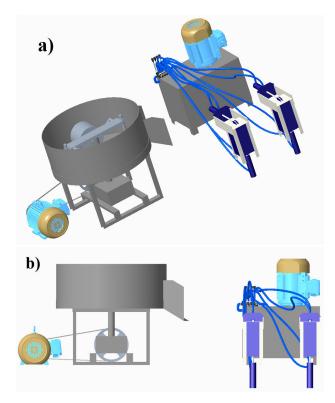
(a): Moulding machine (Isometric view). (b): Moulding machine (Front view).
